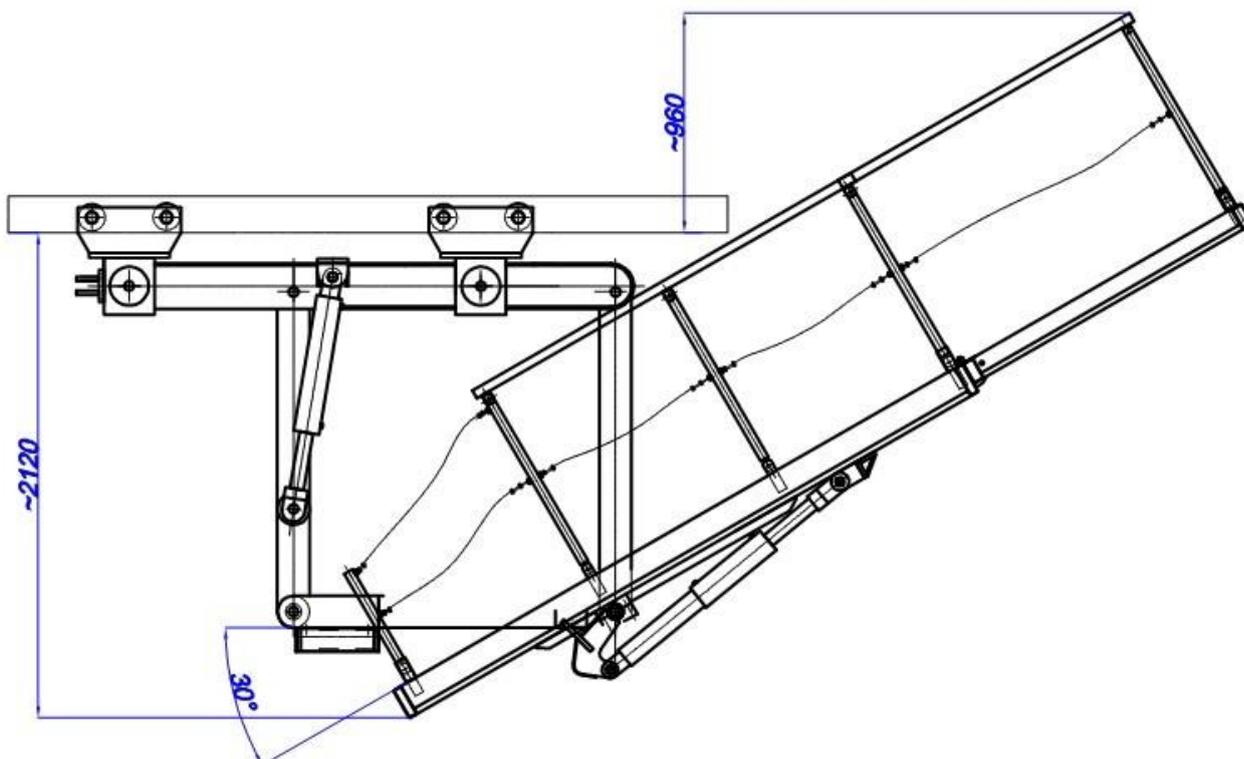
Rail assembly kit, ZM1 type – working platform in the raised position.
